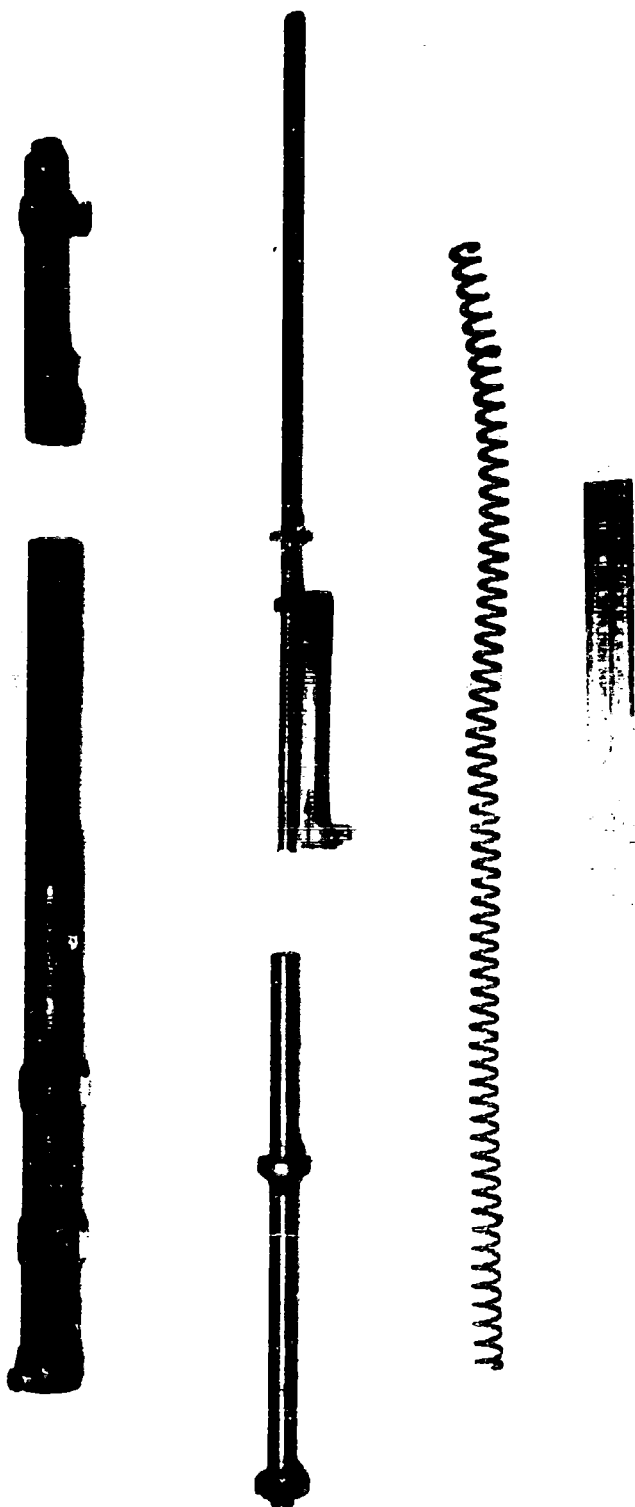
BOLT CHARGER FOR 37MM NS GUN, DISASSEMBLED
